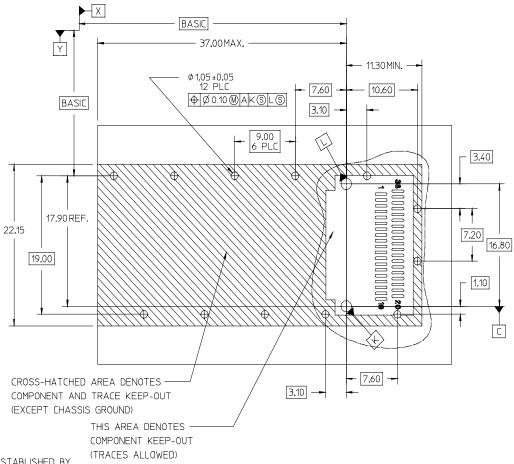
Pattern Layout for QSFP+ Printed Circuit Board
